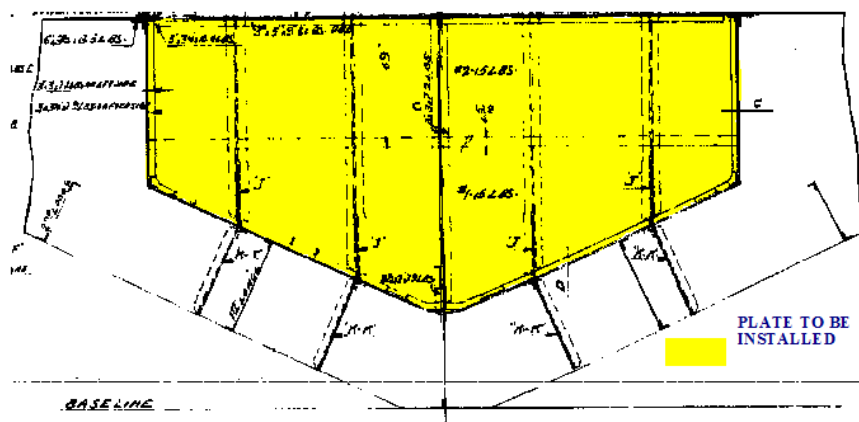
Forward Bulkhead in Aft Emergency Diesel Generator Room at Frame #115, Showing Plate Replacement
